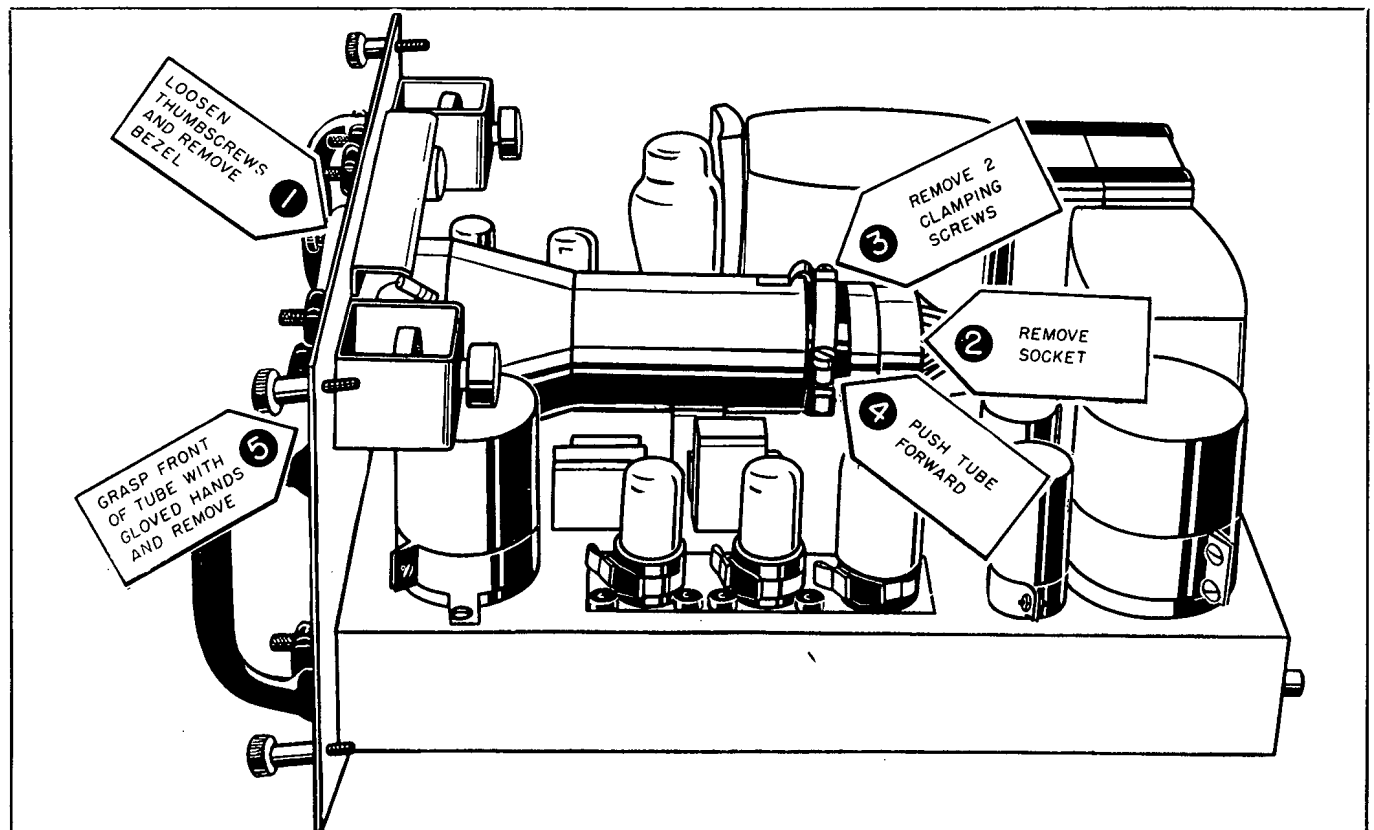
Removal of Cathode Ray Tube in Monitor Scope
